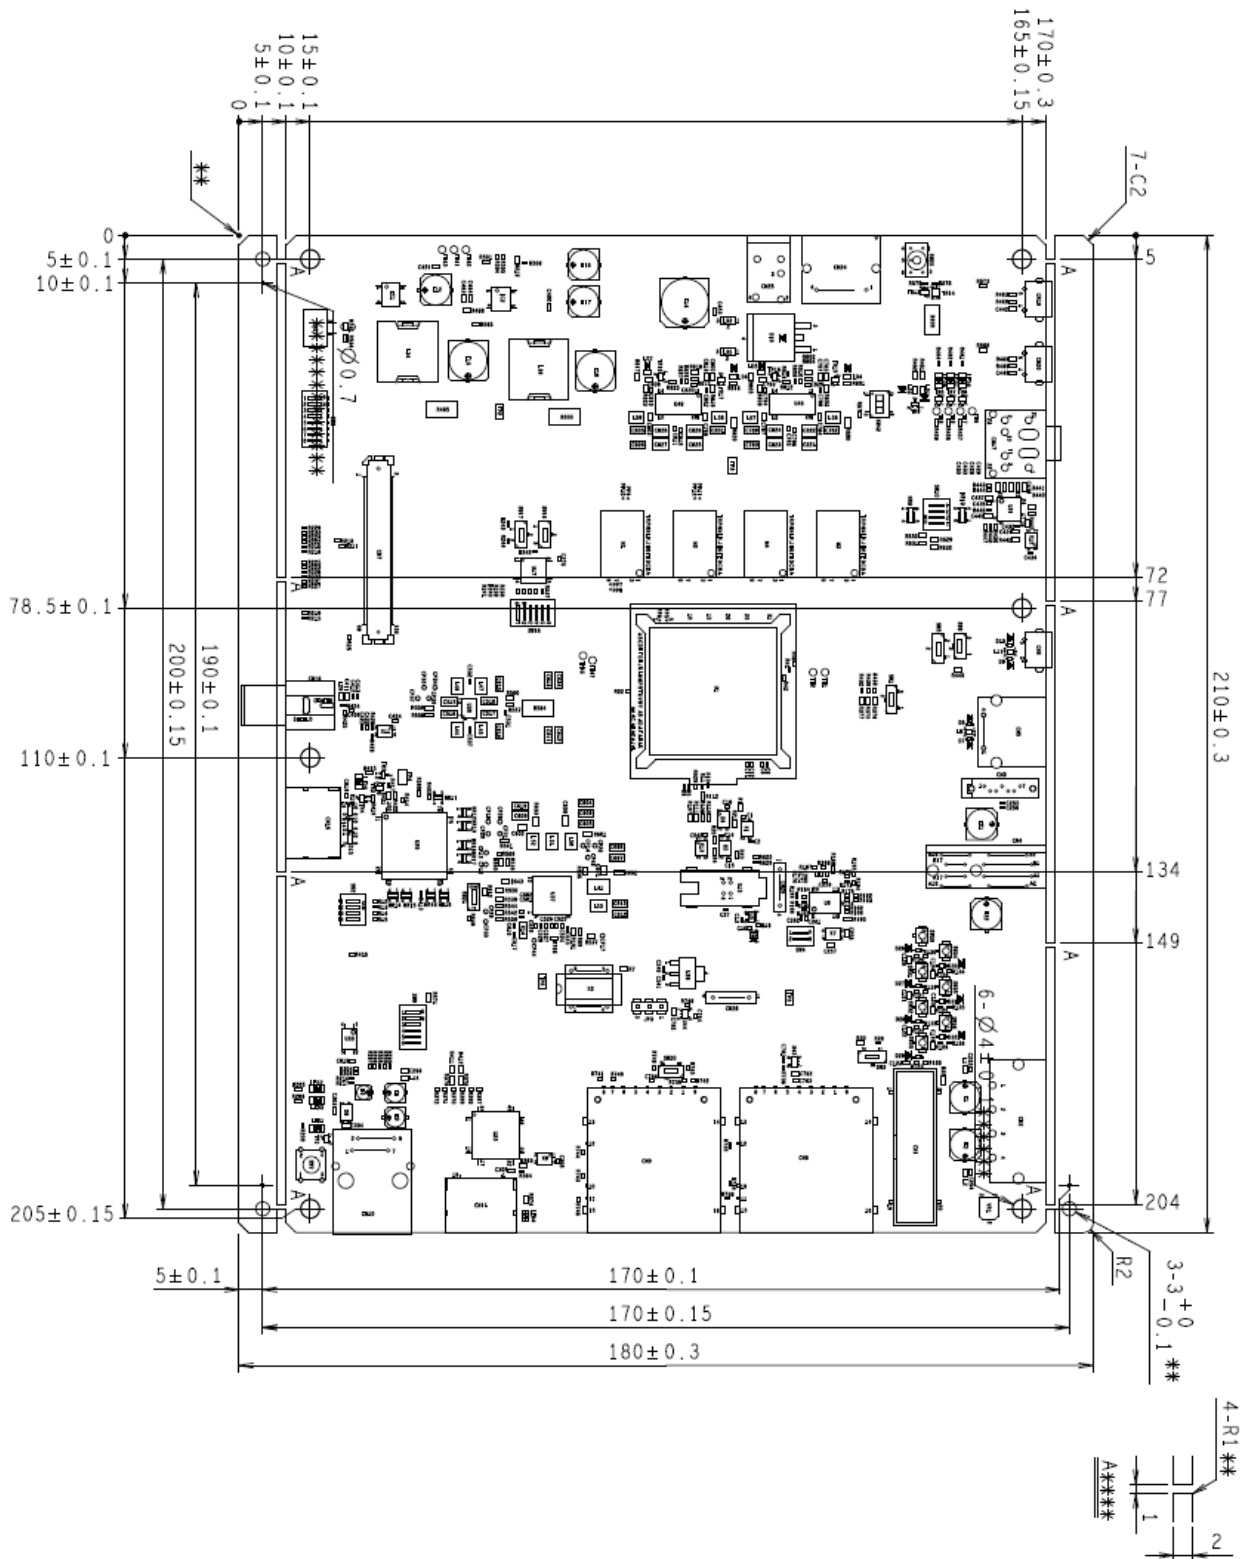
External Dimensions and Hole Locations of the GOSE board
